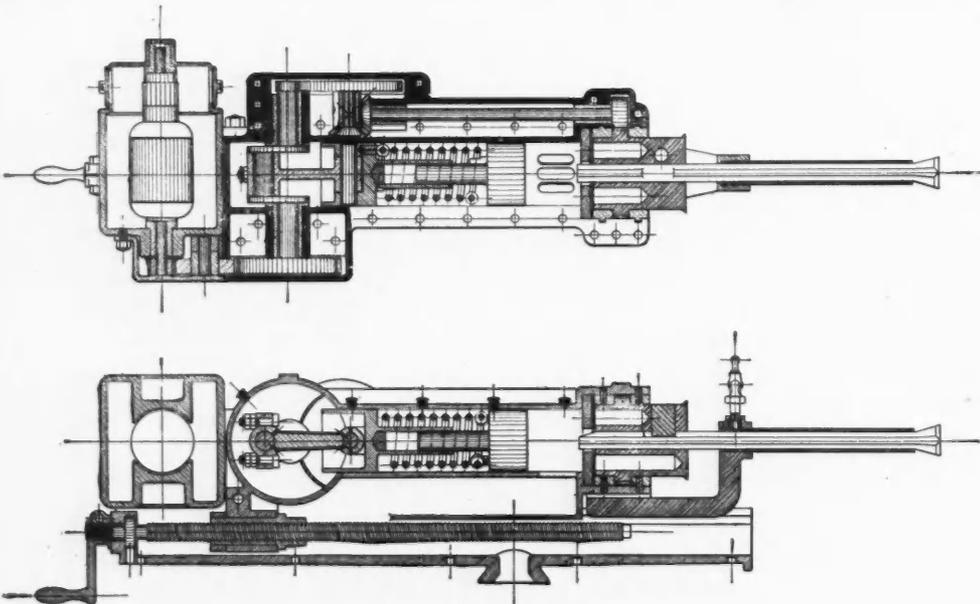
SECTIONS OF BOX ELECTRIC DRILL.
